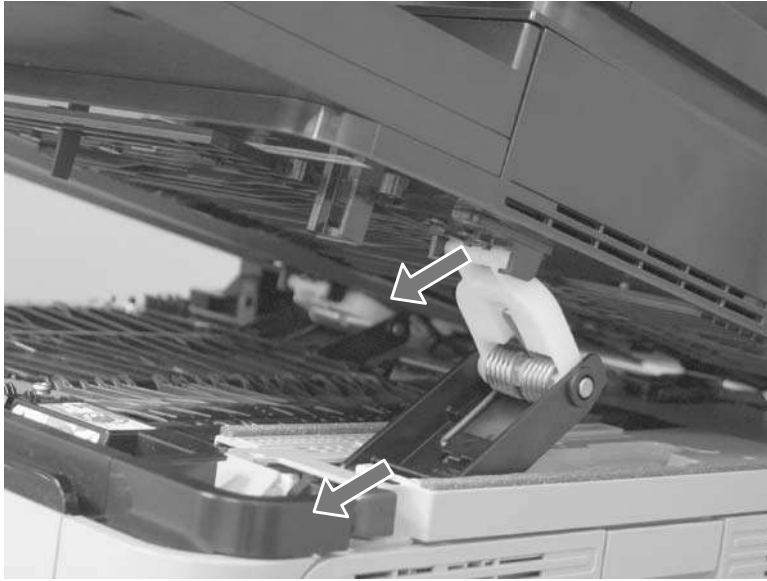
Remove the scissor hinge assemblies (2 of 4)
